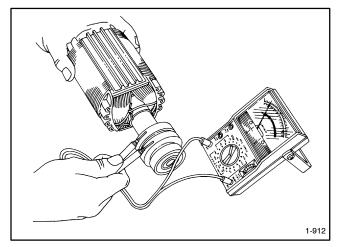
Rotor Resistance Check (10/12RY Shown)
